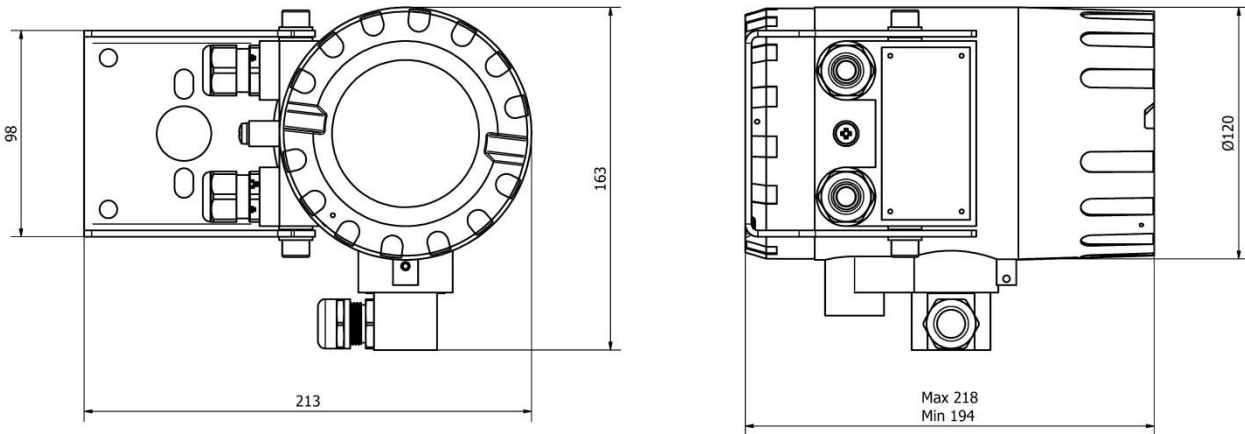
Converter of the flow meter PEM-1000 with the mounting bracket. Overall dimensions
